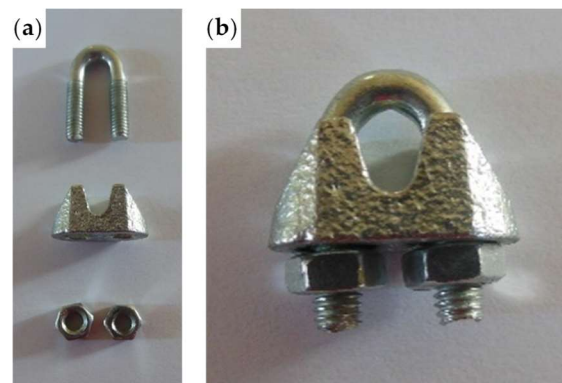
The clips of the experimentation: (a) constituent parts and (b) a clip after assembly.
